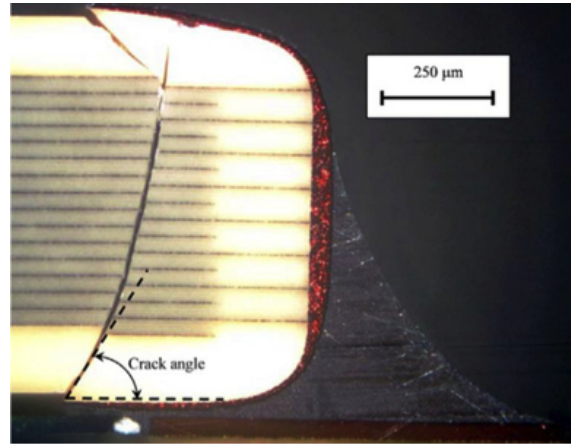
Capacitor failure due to PCB “warpage”
